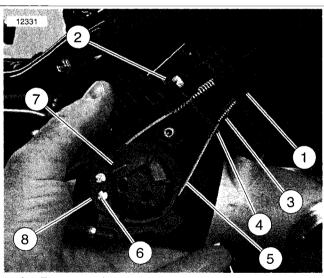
Intake Manifold Mounting Screws: Right Side
